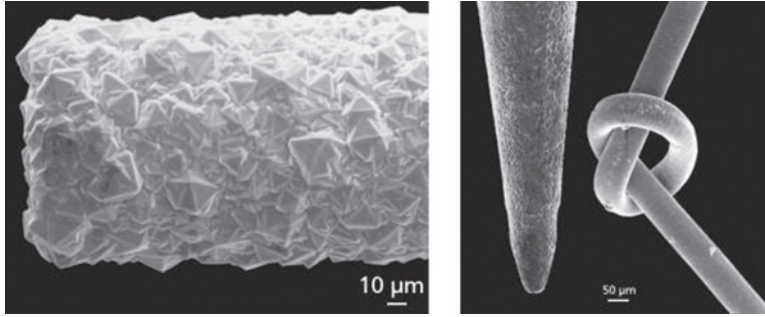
Micro CVD diamond-coated grinding tools. Reproduced with permission from [30]
